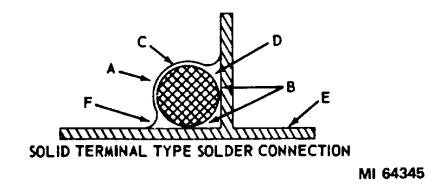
Enlarged cross-sections of properly soldered connections - typical.
